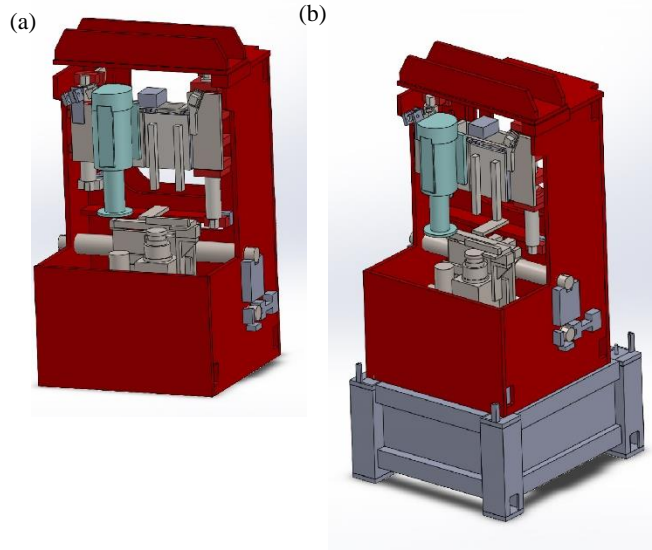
(a) Hahn grinder machine; (b) Hahn grinder machine on stand; the machine is 0.84 by 0.93 by 1.74 meters; has a 3.73 kW (5 hp) external grinding spindle with 17.8 cm wheels, a 7.5 kW internal grinding spindle (not pictured) with 5.9 cm wheels, and can grind cylindrical workpieces up to 12.7 cm diameter that sit on a belt driven spindle attached with a 4 to 6 gearing to a 2500 rpm 4.8 Nm motor.
